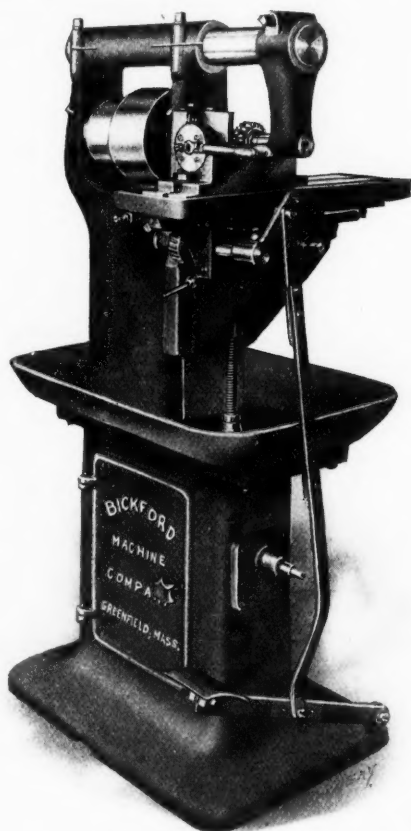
Bickford No. 1 Plain Milling Machine equipped with Tap Squaring Fixture
